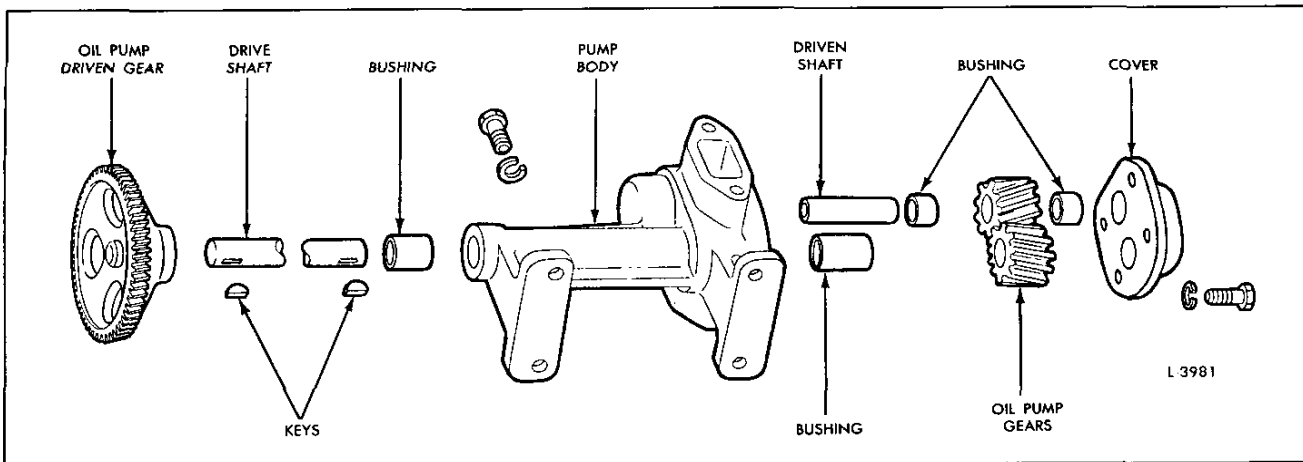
Lubricating Oil Pump Details and Relative Location of Parts (8V Engine)
